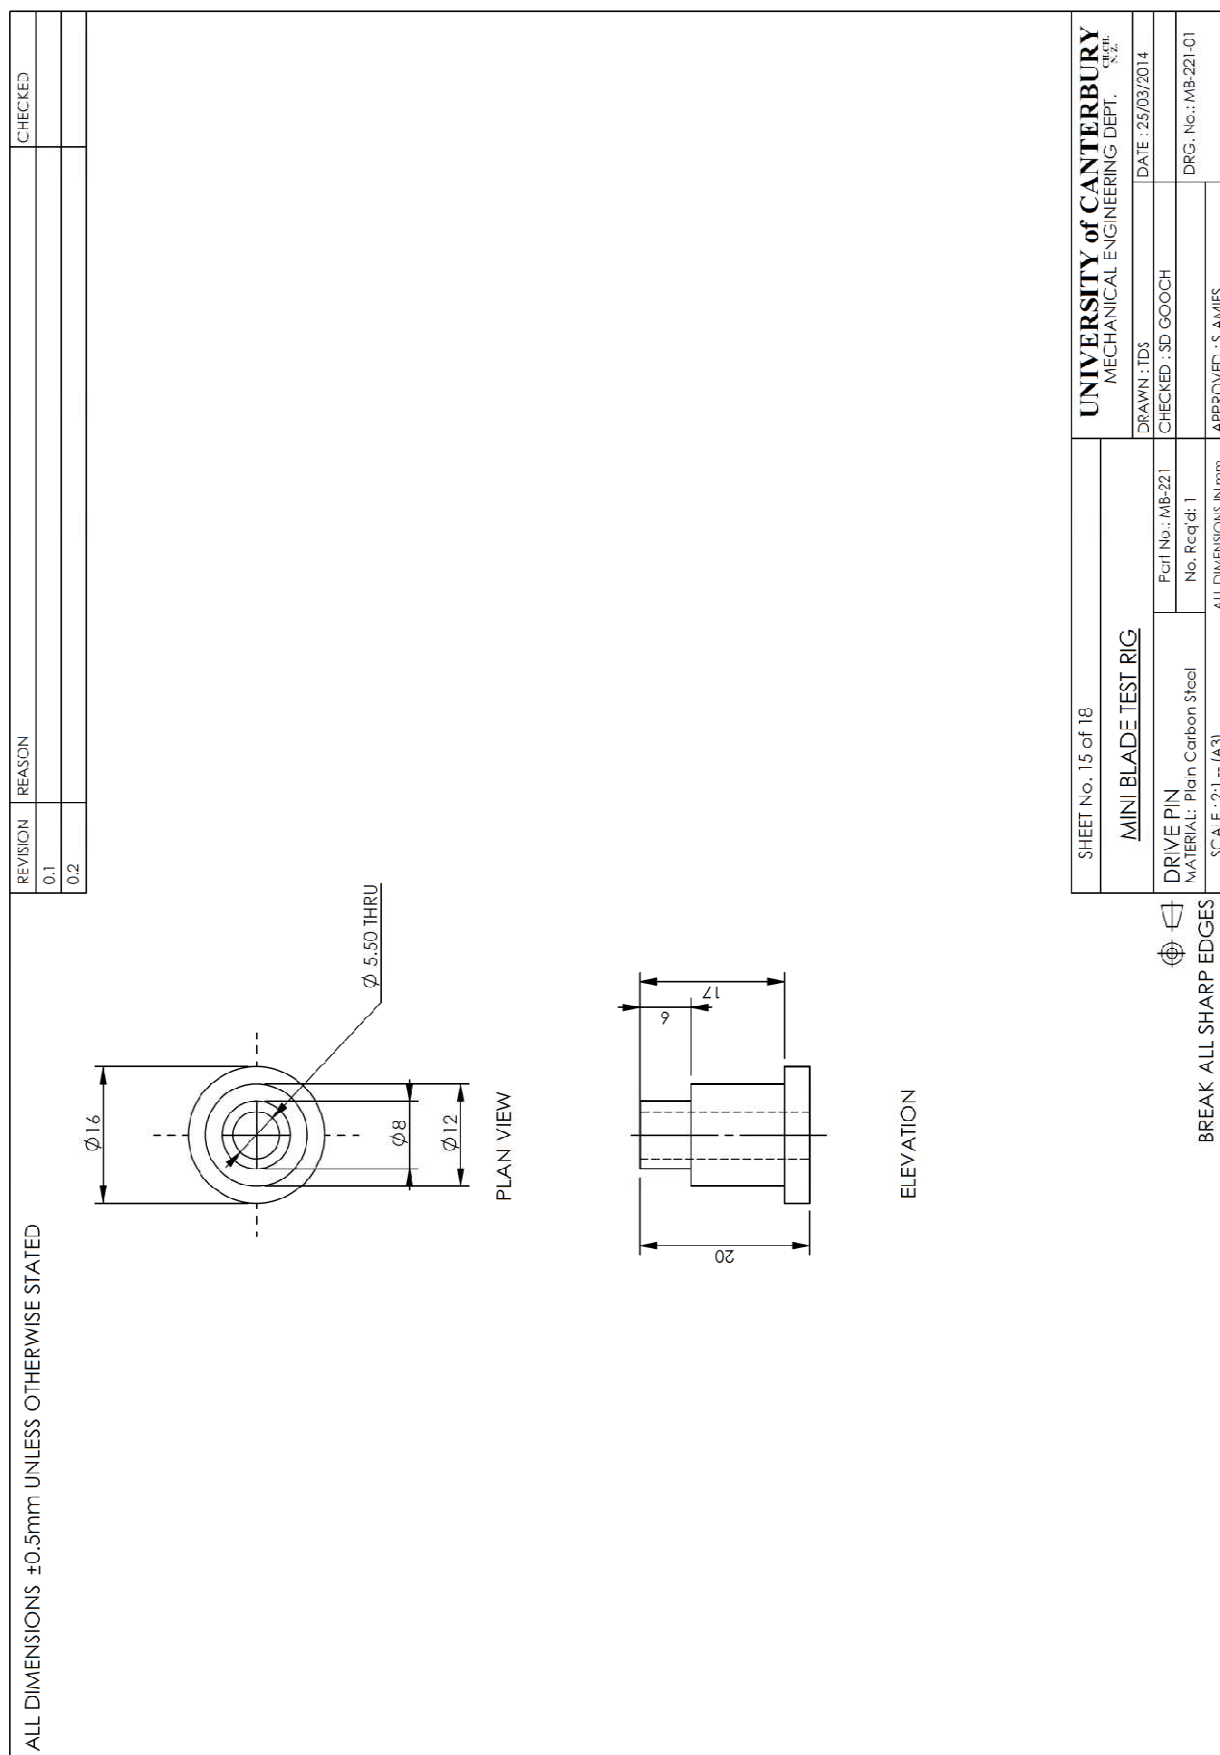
Manufacturing drawing of the drive pin in variable stroke test rig.
